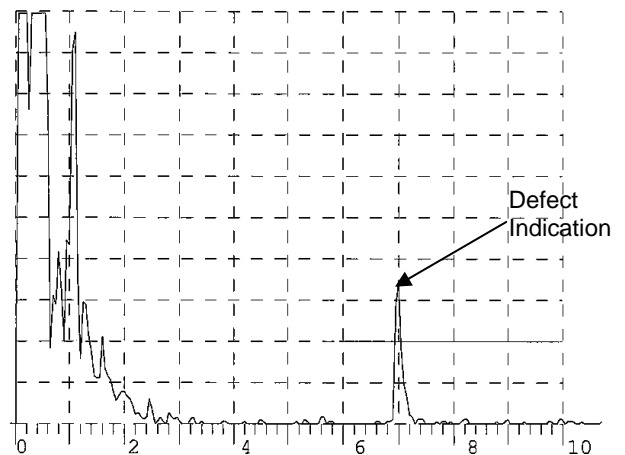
Ultrasonic Method A-scan showing a Casting Defect
